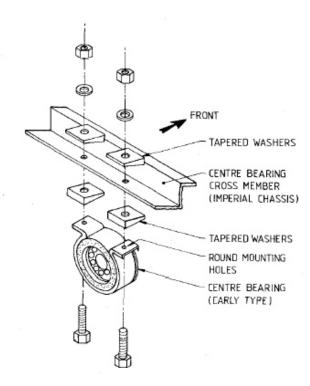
Imperial Tube Chassis Centre Bearing Assembly and Tapered Washers
